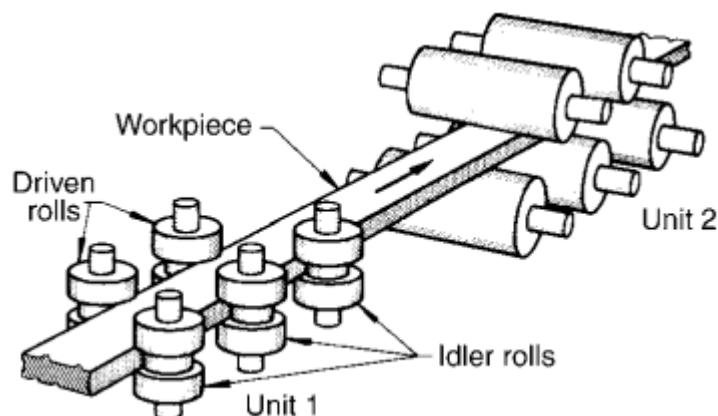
Roll straightener for straightening a rectangular-section bar [71].
